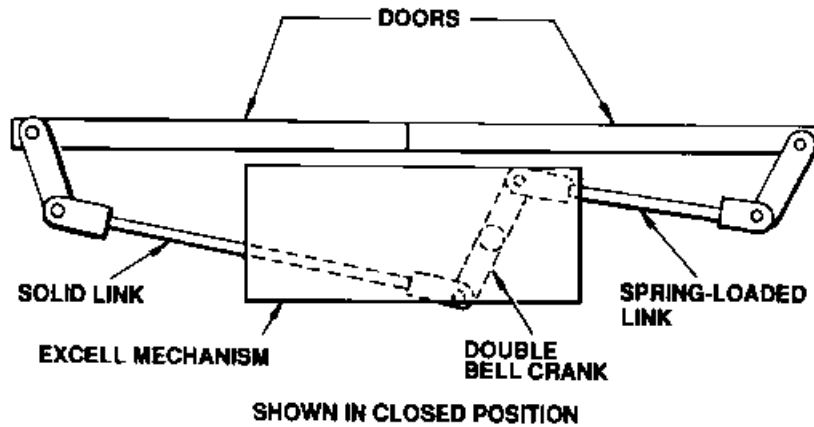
An example of a double-out set of doors using a double bell crank on the mechanism drive shaft. May also be used for 1-in, 1-out doors by repositioning the linkage.
